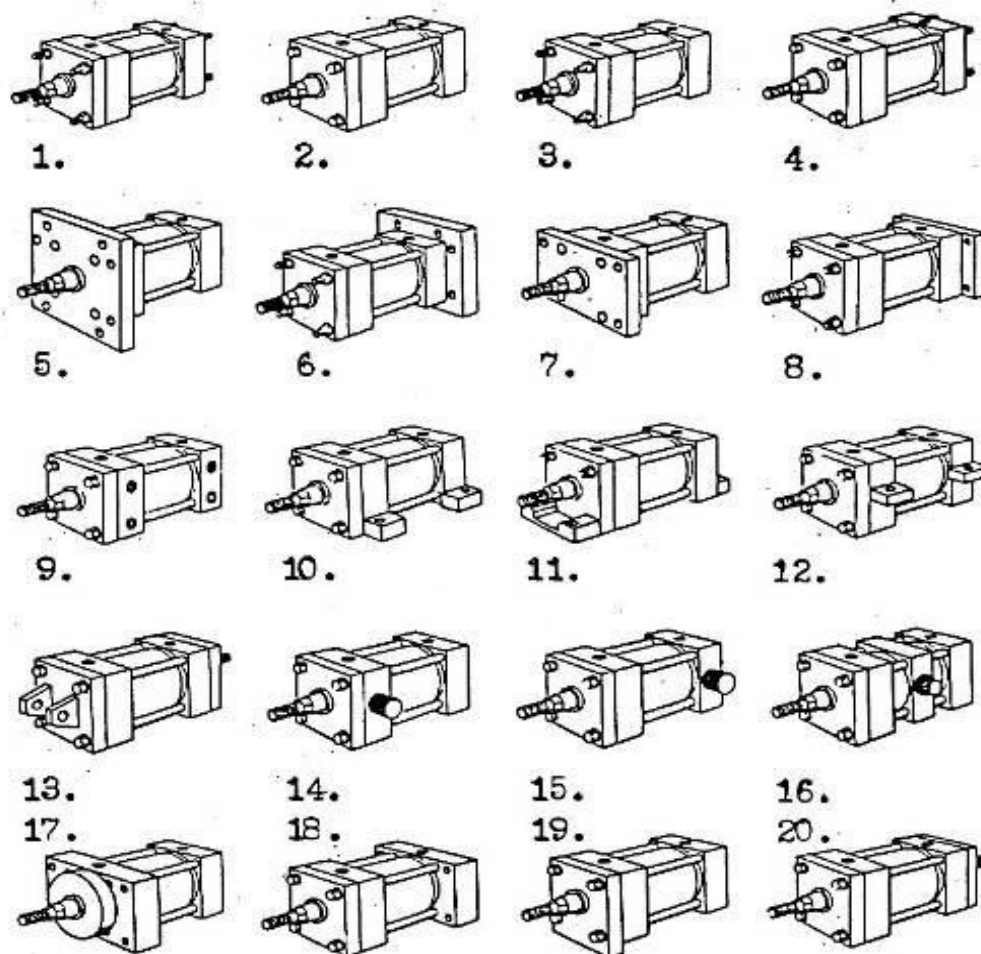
Mounting options for the hydraulic cylinder body.
